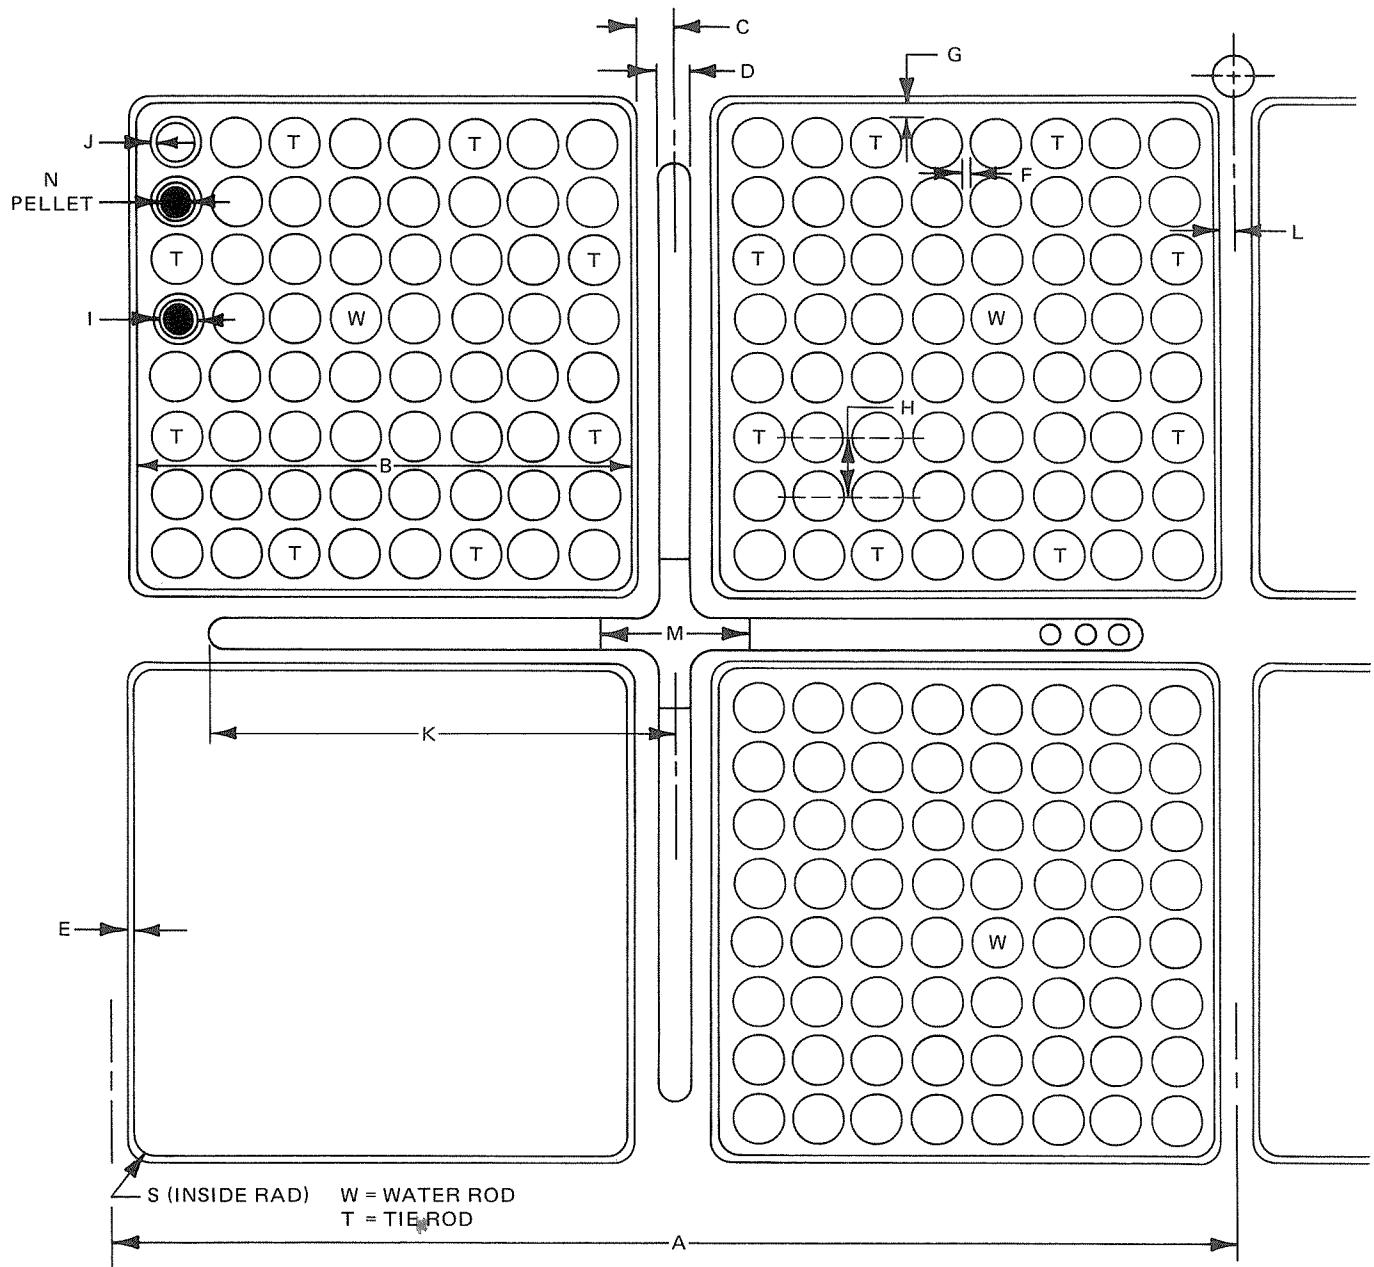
Reload-2 Fuel Assembly Lattice for 100-mil Channels
